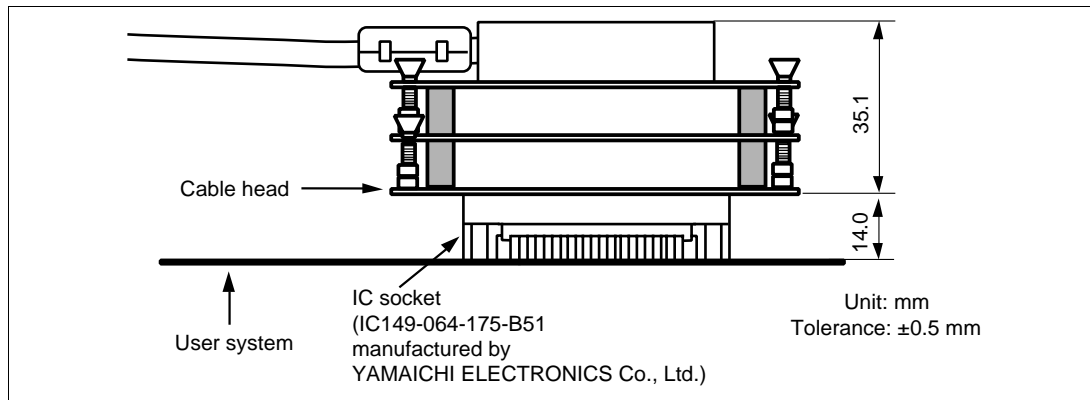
Resulting Dimensions after Connecting User System Interface Cable
